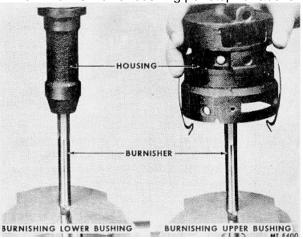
Burnishing Upper and Lower Bushings Using Burnisher SE-1955-2
